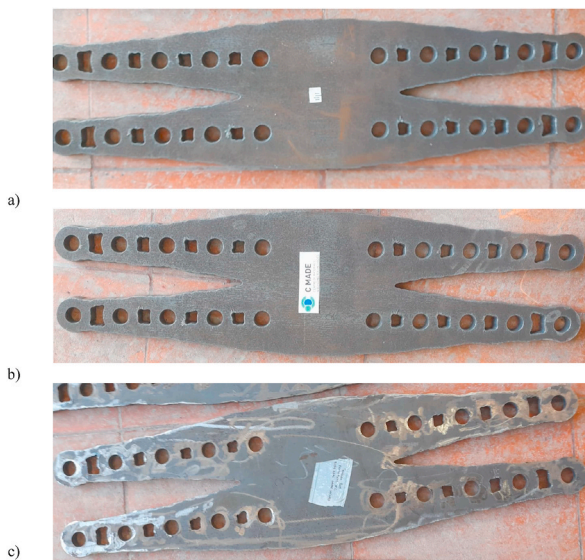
Optimised prototypes. a) Part T1, b) Part T2 and c) Part T3.
